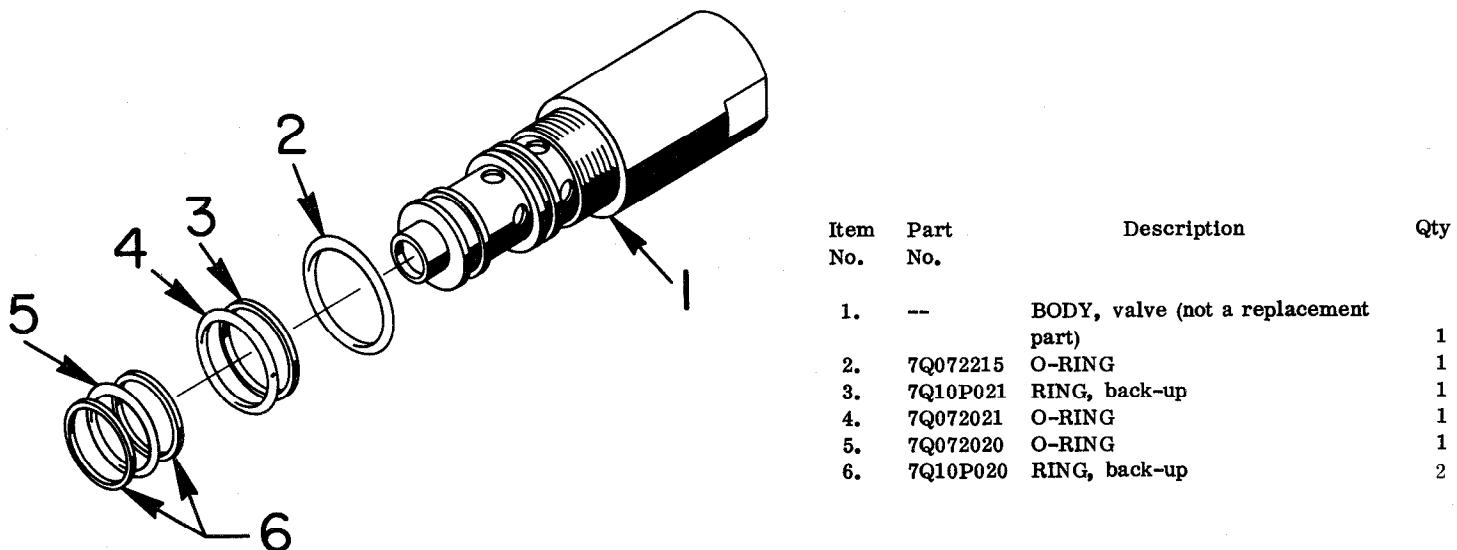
Counter Balance Holding Valve (Part Number 73054242)
